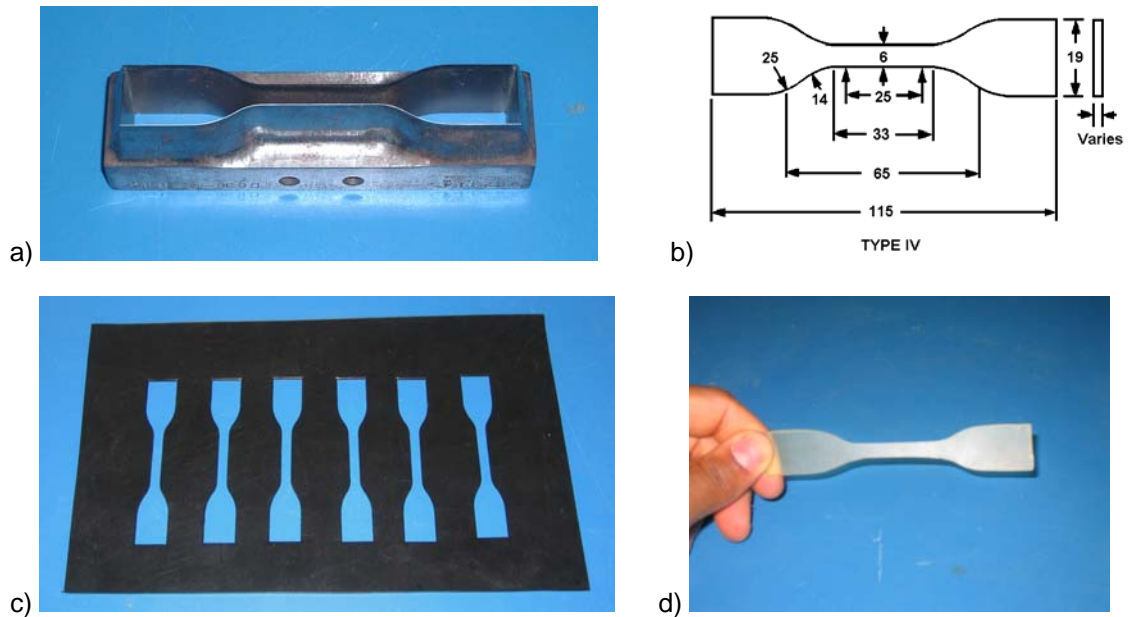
a) Type IV dumbbell cutting tool, b) Dimensions of the type IV dumbbell cutting tool, c) Mould made out of the GSE HD membrane, d) Resin Coupon
